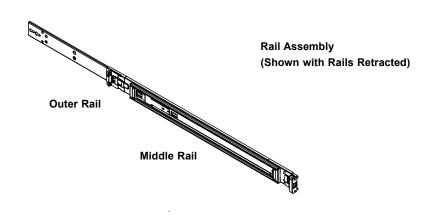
Identifying the Outer Rail, Middle Rail and Inner Rail (Left Rail Assembly Shown)
